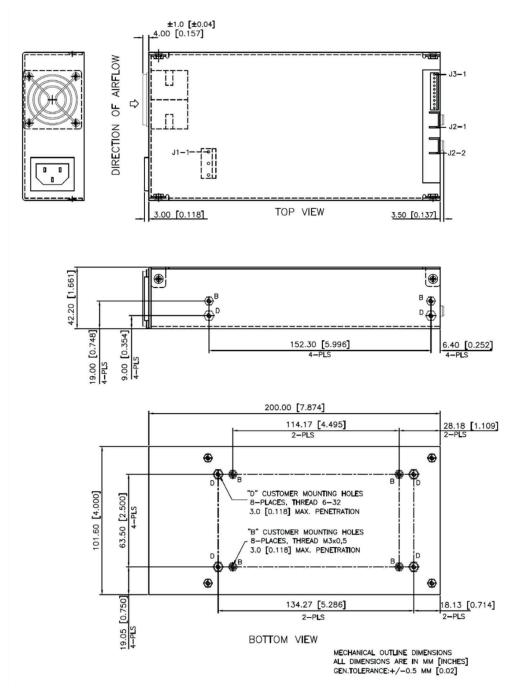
Mechanical Drawing (With Side Fan Mounting)
